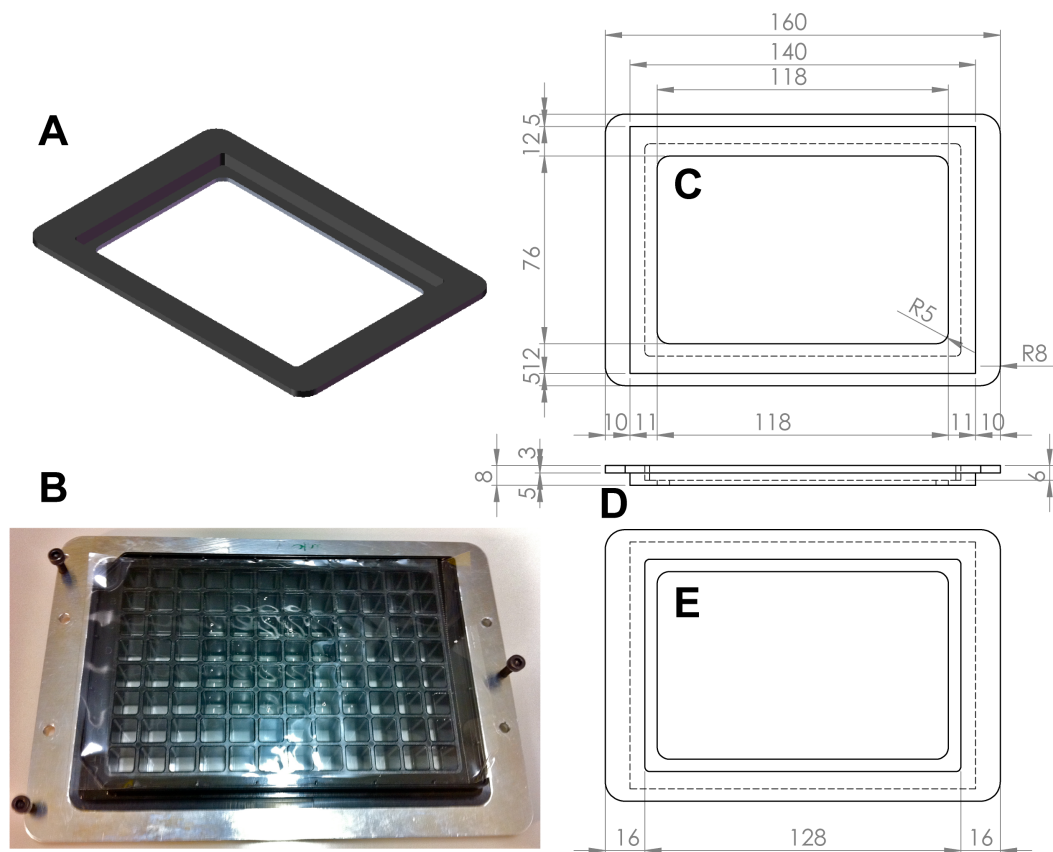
Image and drawings of the wellplate holder. A) Rendered 3D view of the holder. B) Image of the holder together with a sealed wellplate. The holes and screws for height adjustment can be seen. C) Bottom view. D) Side view. E) Top view. (Drawings by Bengt Wunderlich)
